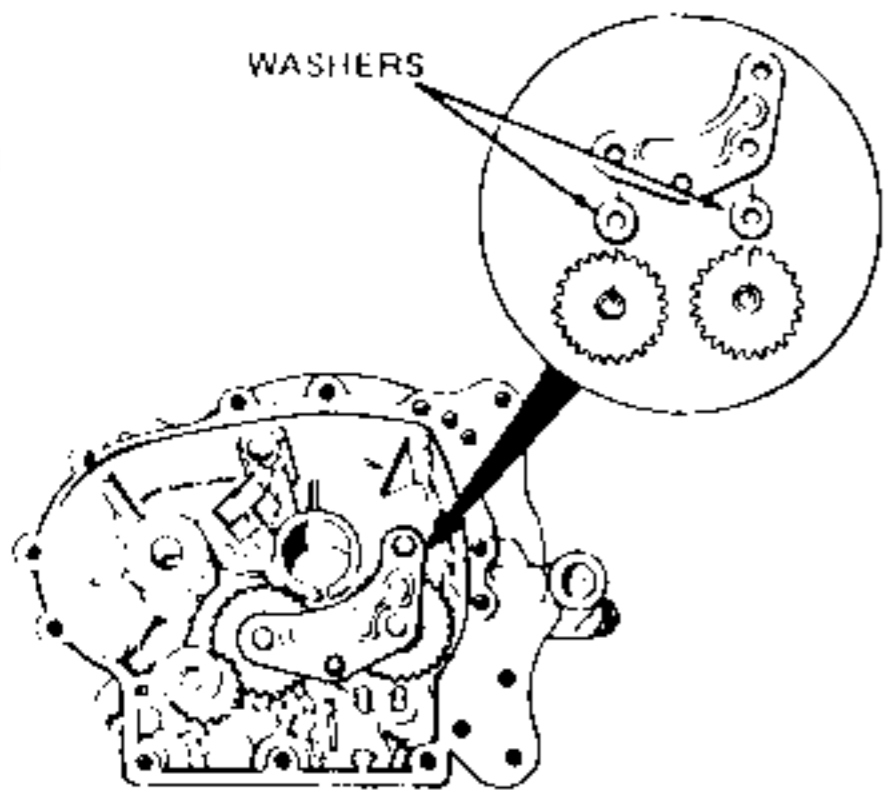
View showing Dyna-Static balancer gears installed in Model VM80 or VM100 engine base. Balancer gears are identically located in Model HM80 or HM100 crankcase cover. Note location of washers between gears retaining bracket.
